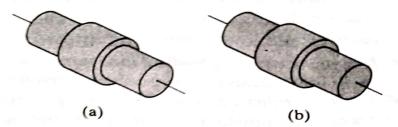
Two parts of identical shape and size but different manufacturing requirements: (a) 1,000,000 pc/yr, tolerance = $\pm 0.010 \text{ in}$, material = 1015 CR steel, nickel plate; and (b) 100 pc/yr, tolerance = $\pm 0.001 \text{ in}$, material = 18 - 8 stainless steel.
